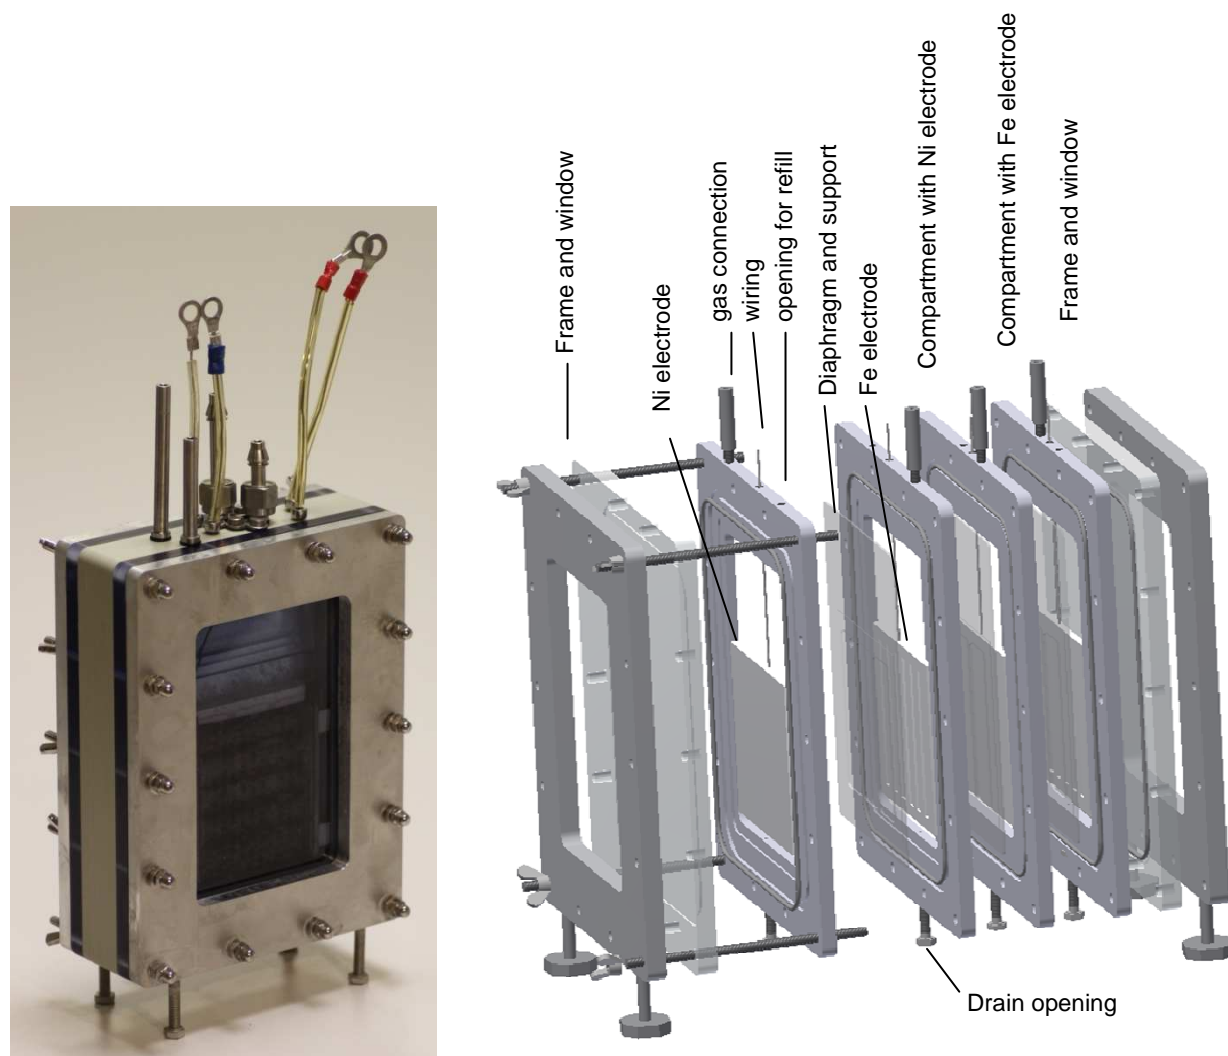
The final battolyzer, left: picture; right: exploded view
